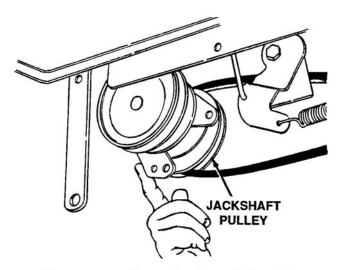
Removing Front Drive Belt From Jackshaft Pulley
